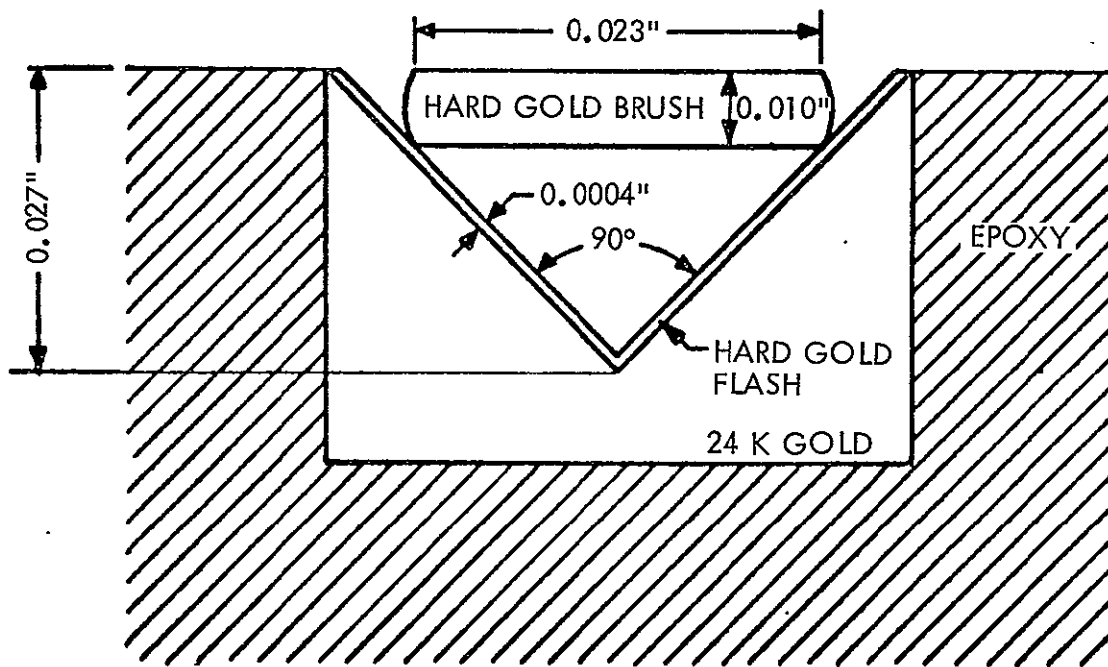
Cross Section of Poly-Scientific Brush-Ring, Type 1709
